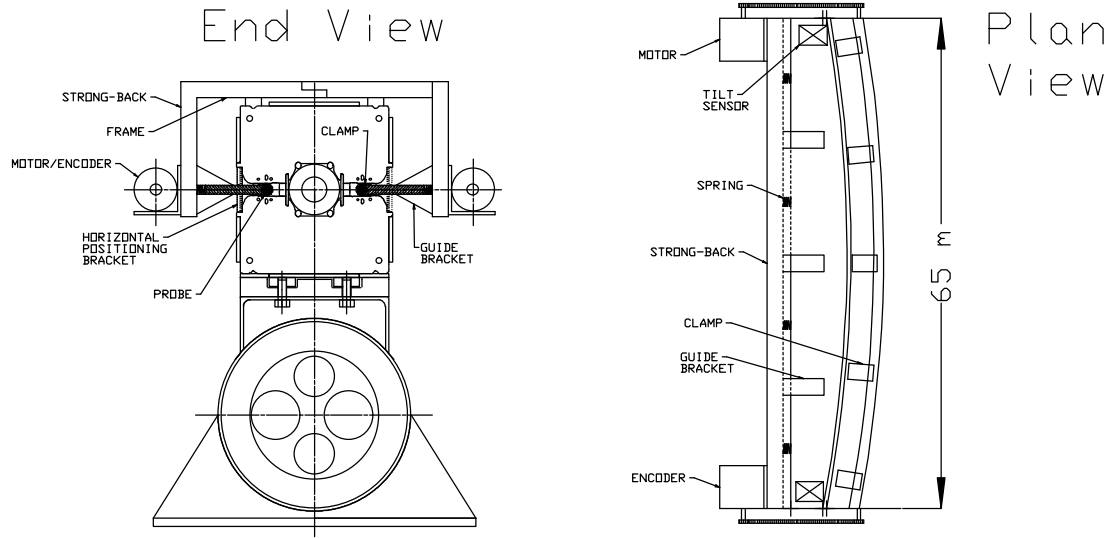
Proposed rotating coil mechanical layout for arc dipole measurements.
